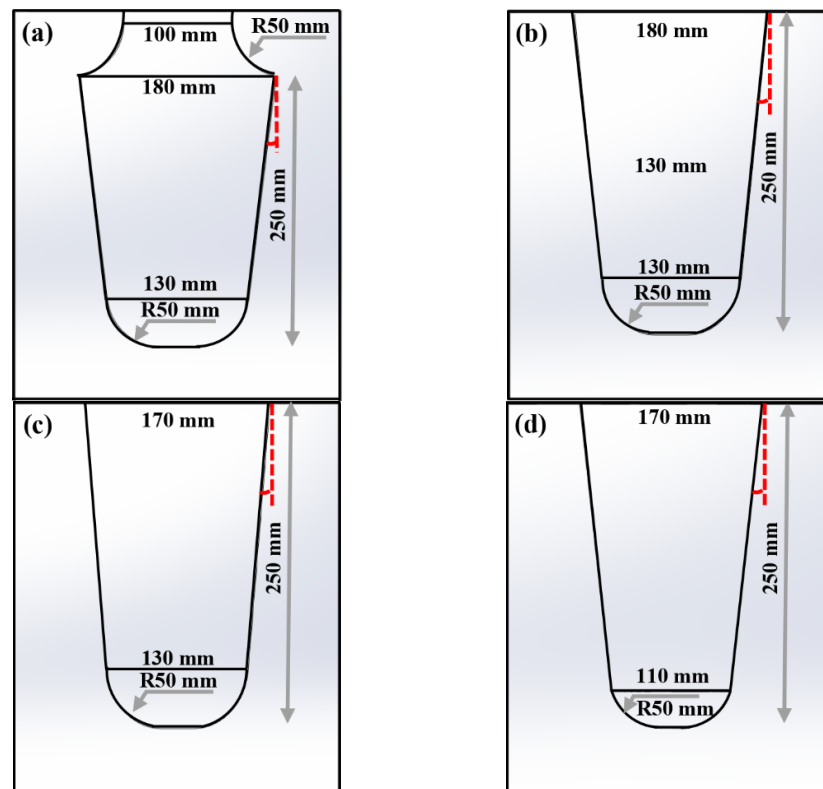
Mold design: (a) mold I; (b) mold II; (c) mold III; (d) mold IV.
